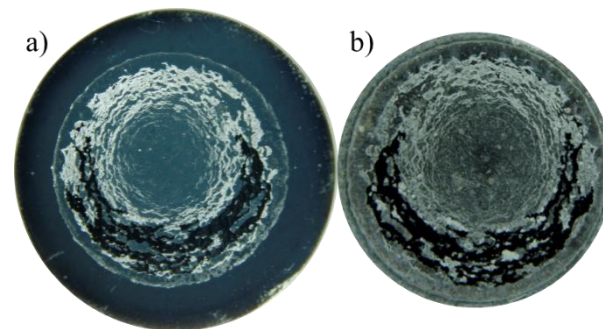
Contact surfaces of a) the sample and b) the casted aluminum alloy.
